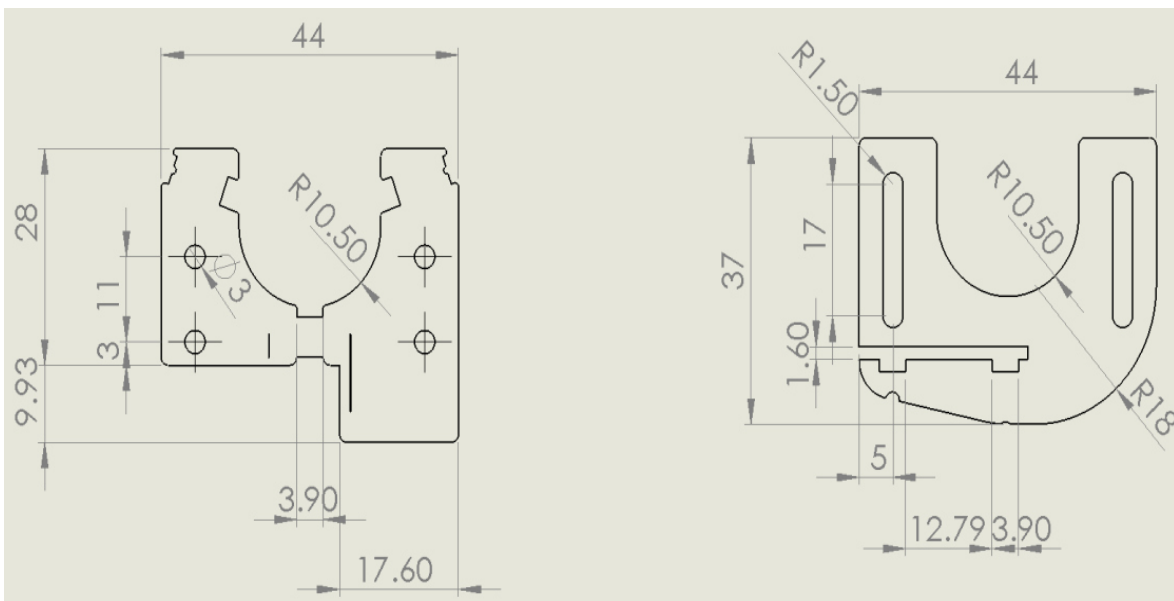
'Photodetector Distance mount Adjustable'. To mount the phase detector board to the laser at adjustable distances
